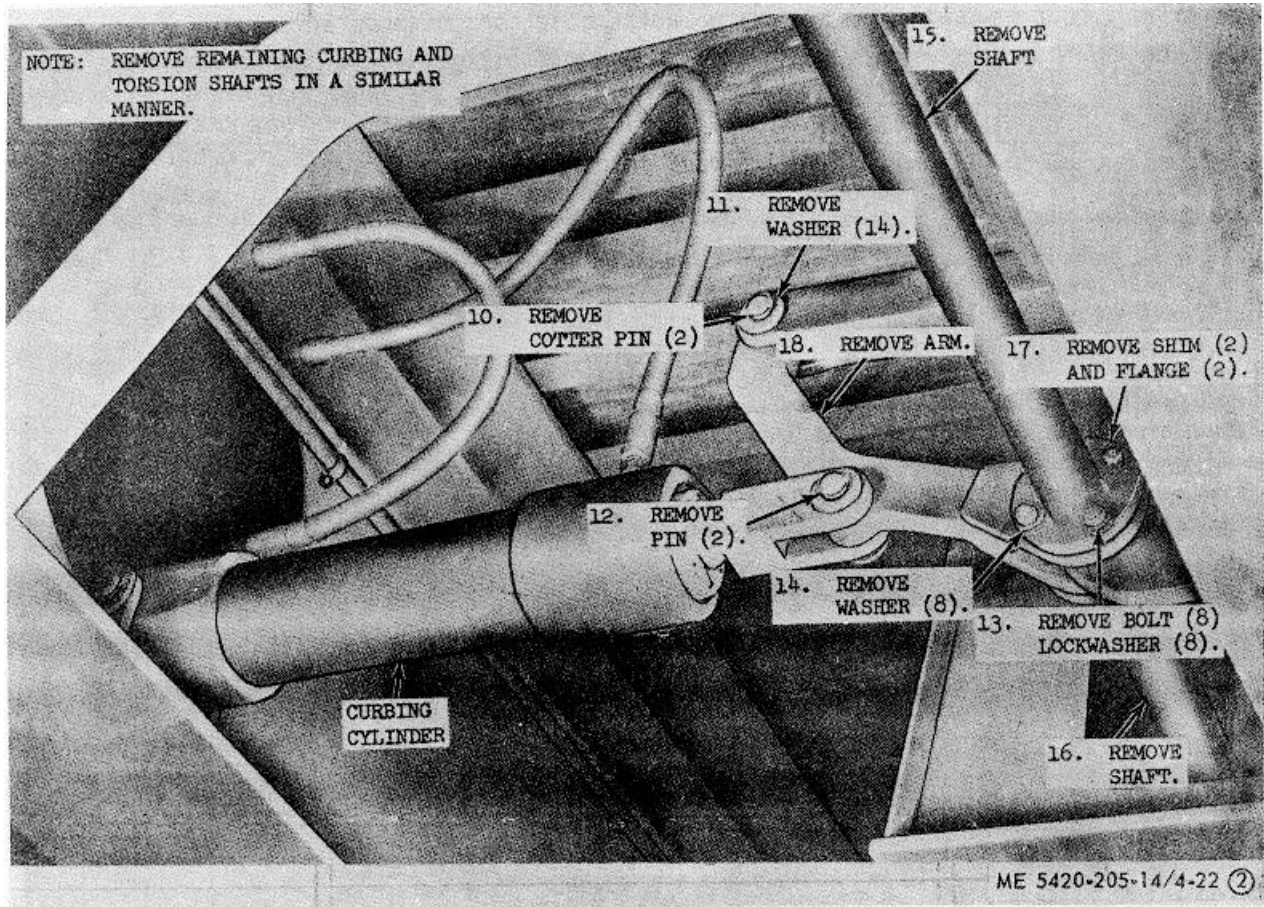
Curbing and torsion shaft, and ramp bracket, removal and installation. (sheet 2 of 3)
